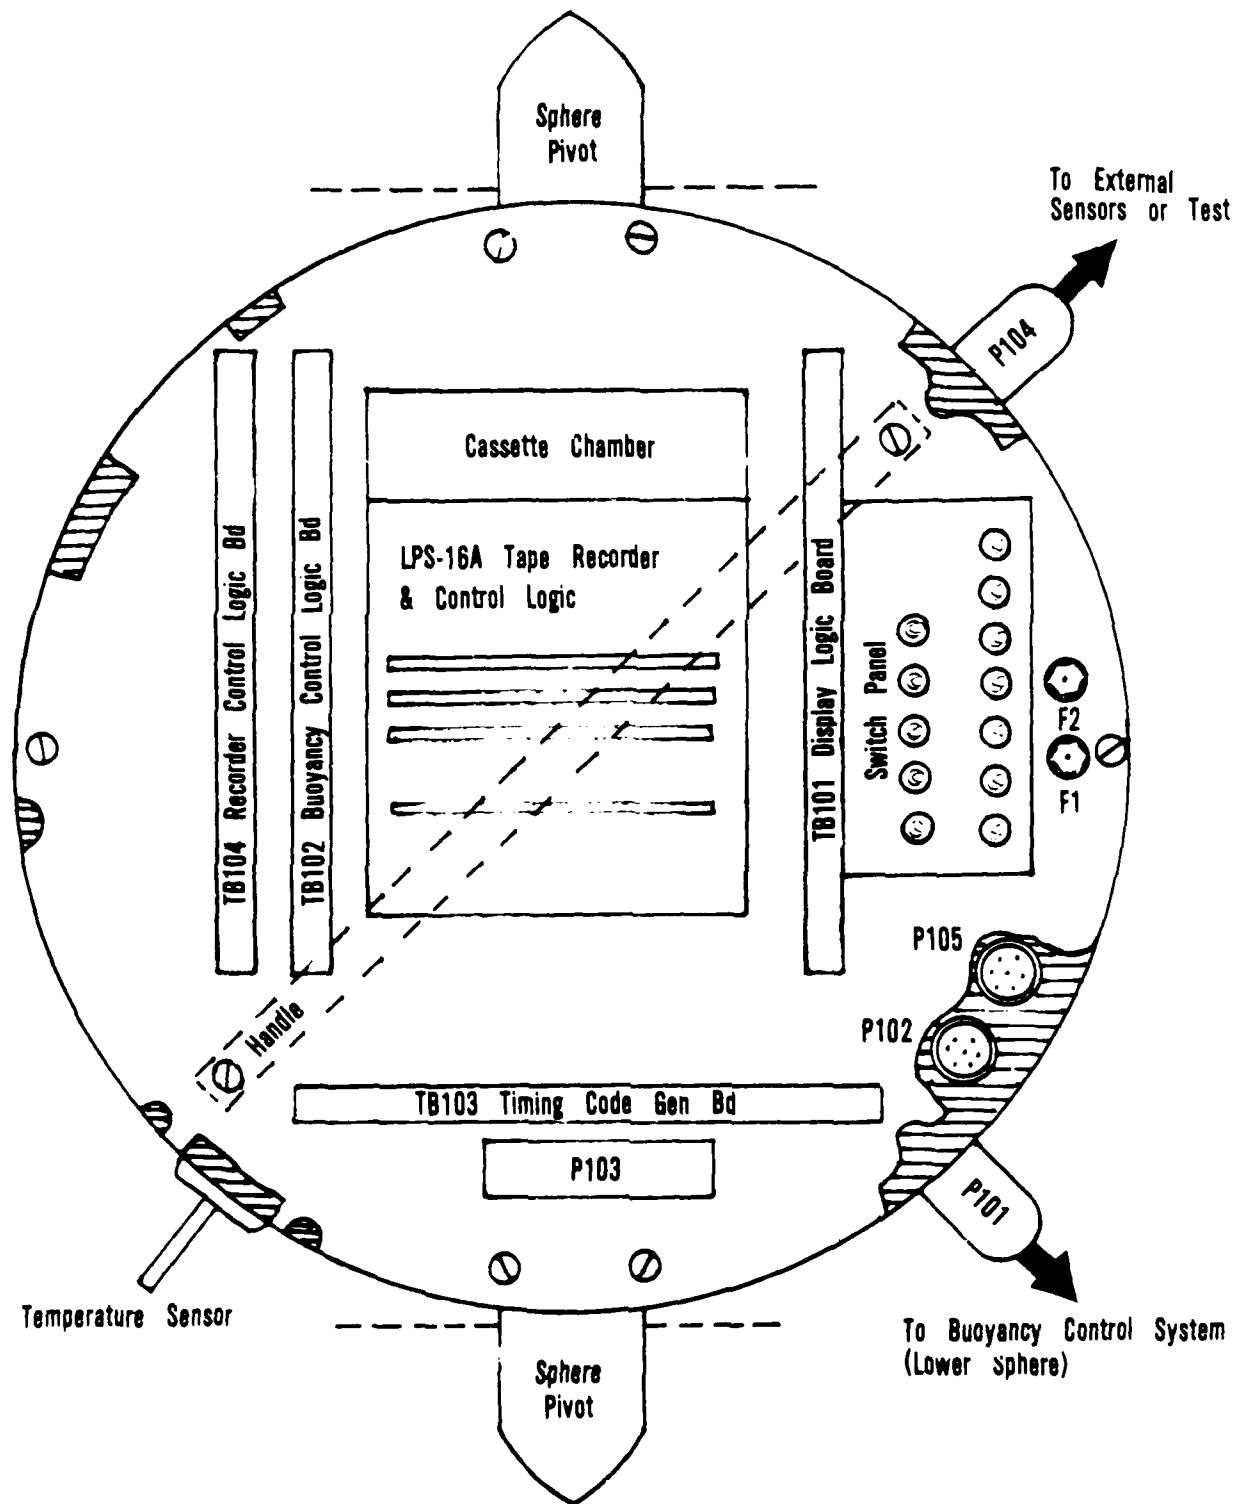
Top View of chassis in the upper sphere Main Control (Recorder Housing)
